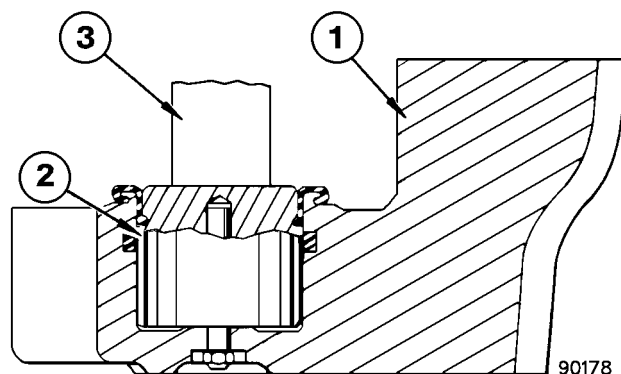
PISTON INSTALLATION (Retracted Position)
